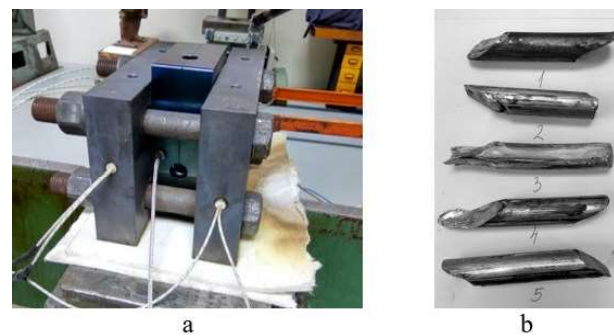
a) ECAP tool b) Recycled samples (DE+ECAP),
